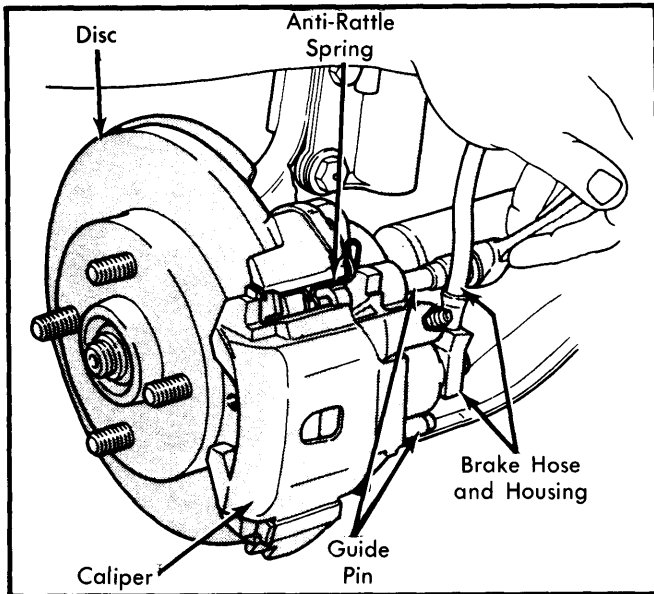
Removing or Installing Caliper Guide Pins (Omni and Horizon)
